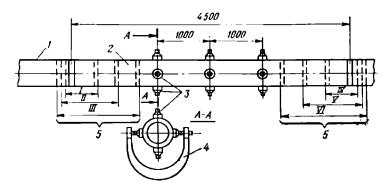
Test section of a steam pipeline 1—steam pipeline; 2—test section; 3—bosses; 4—snap gauge for measuring residual deformation, 3—cutting specimens for tests; I-VI—cutting sequence
